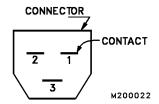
INCLINOMETER SIDE CONNECTOR VIEW
